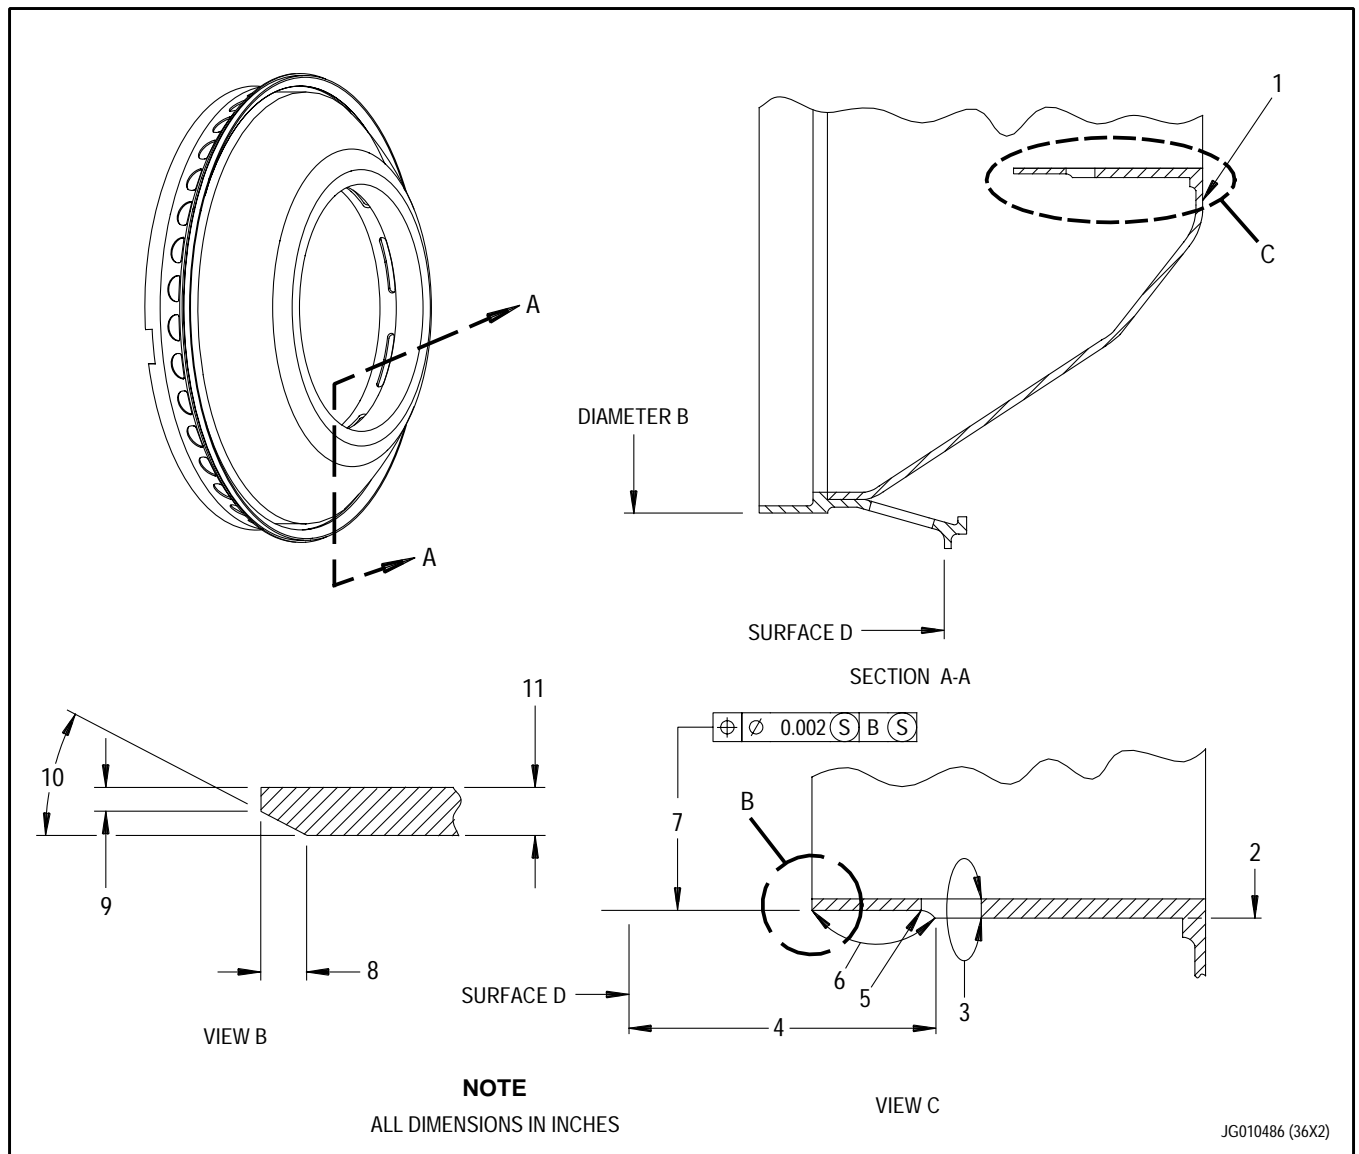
No. 4 Bearing Rear Air Sealing Ring Assembly - Nickel Plate Repair
